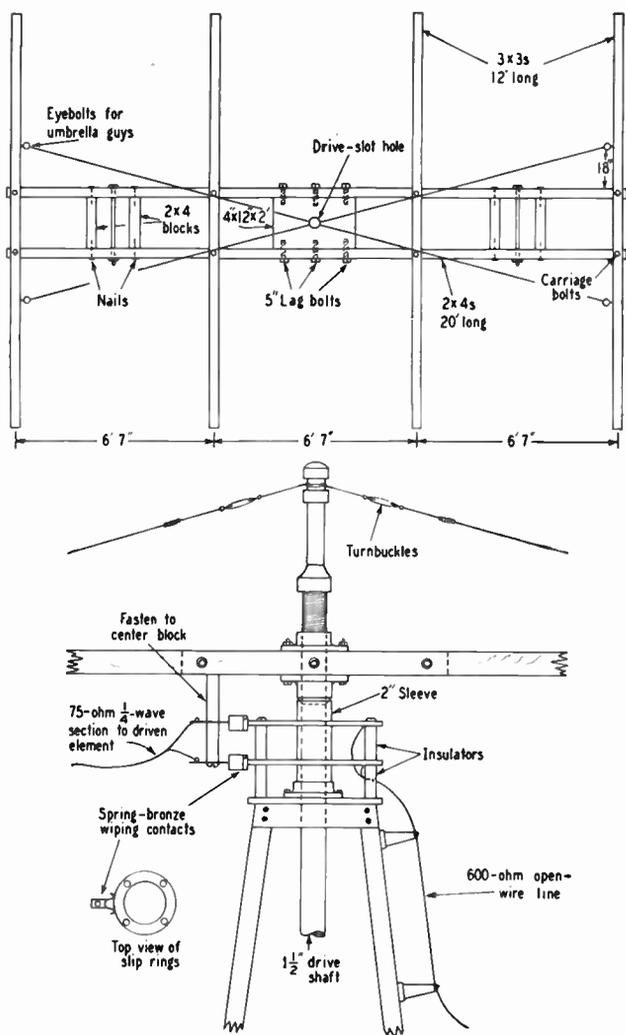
Details of the wooden boom, its method of support and the construction of the slip rings.
